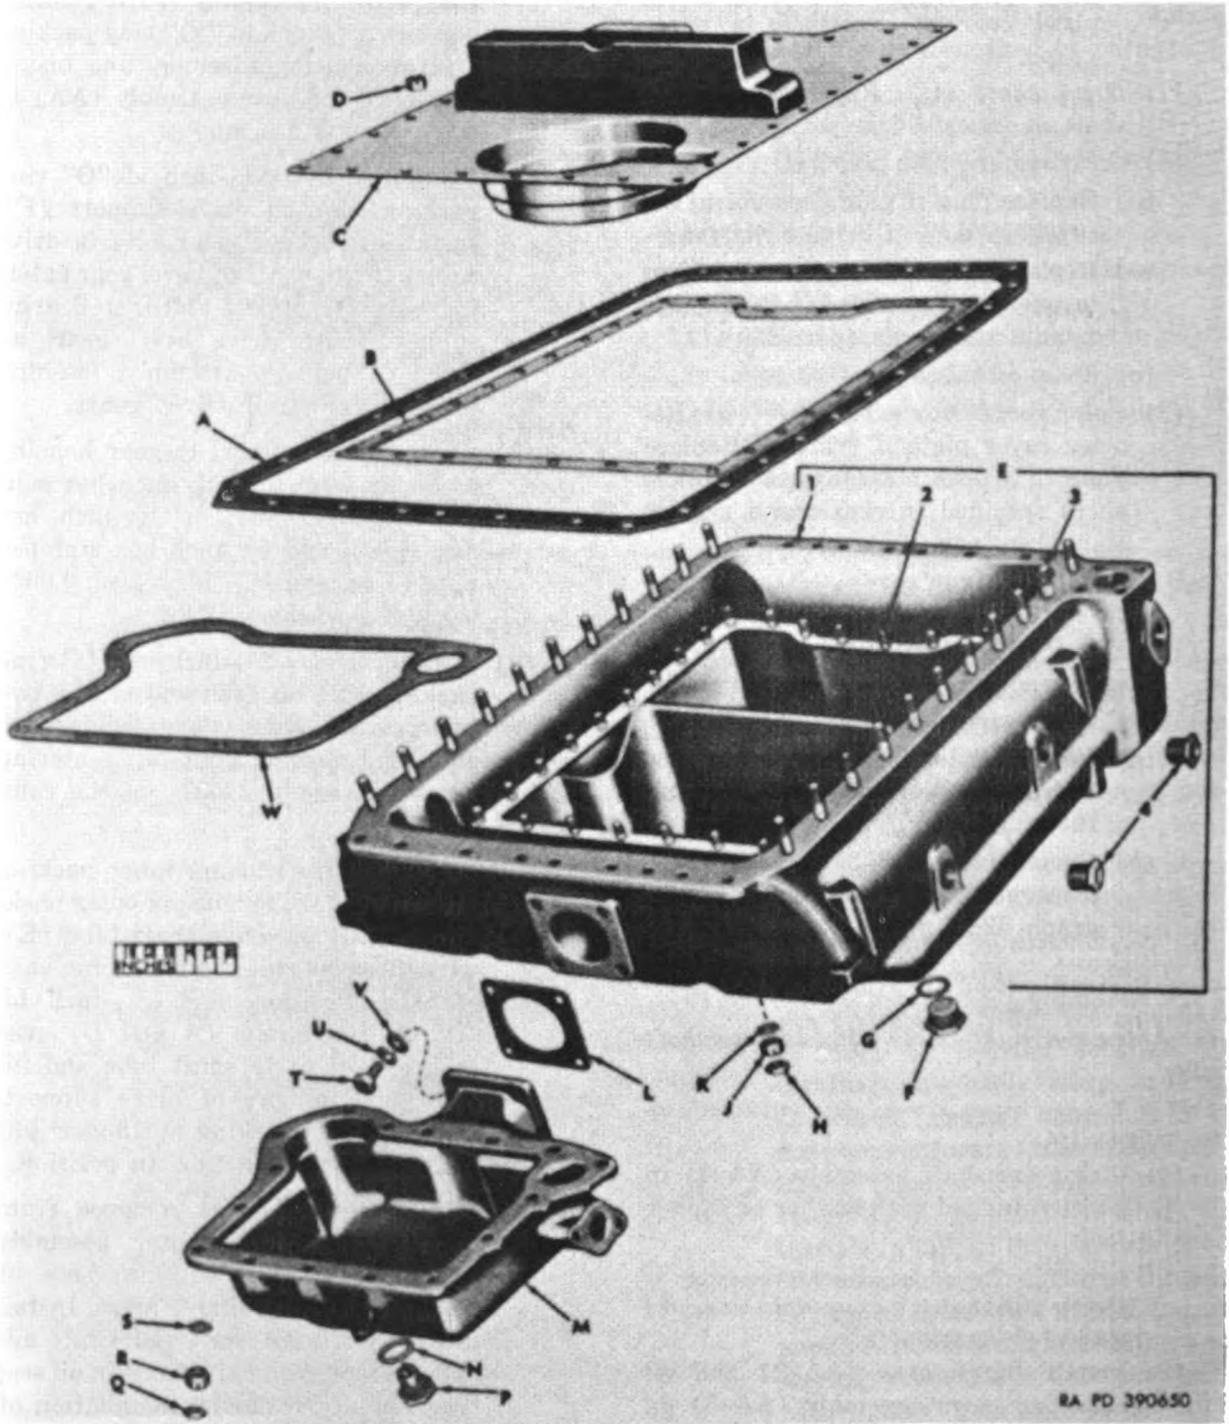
Crankcase oil pan and accessory case oil sump—exploded view.
